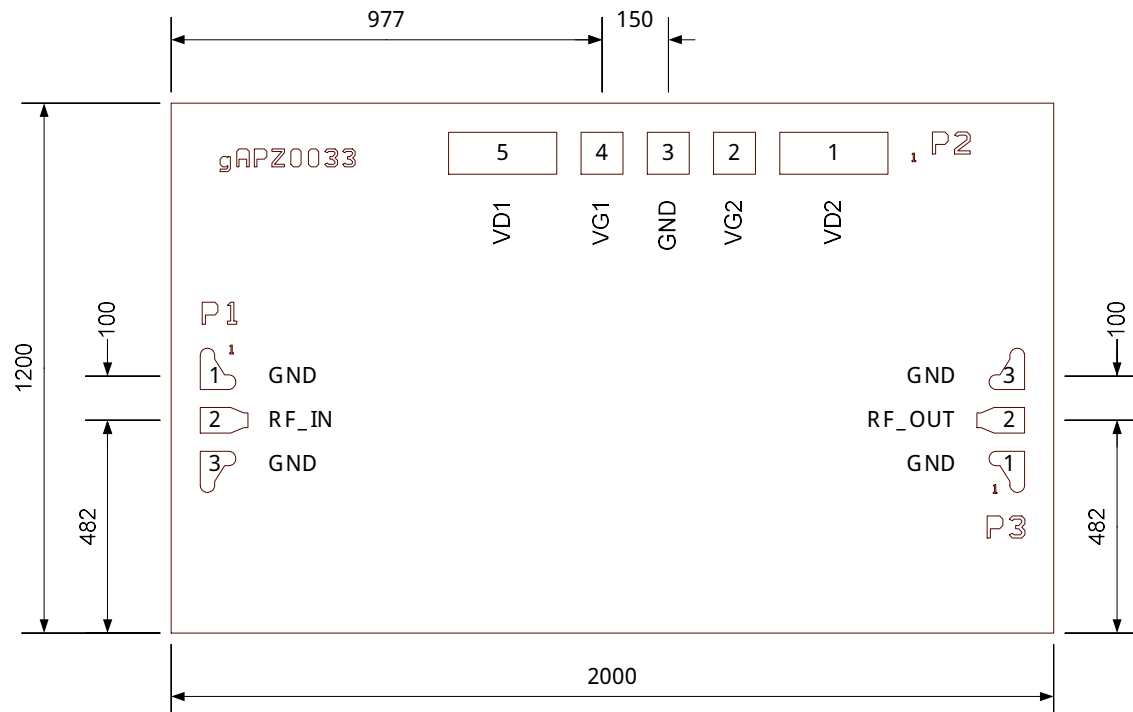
Outline drawing of the MMIC. Dimensions are in µm.
